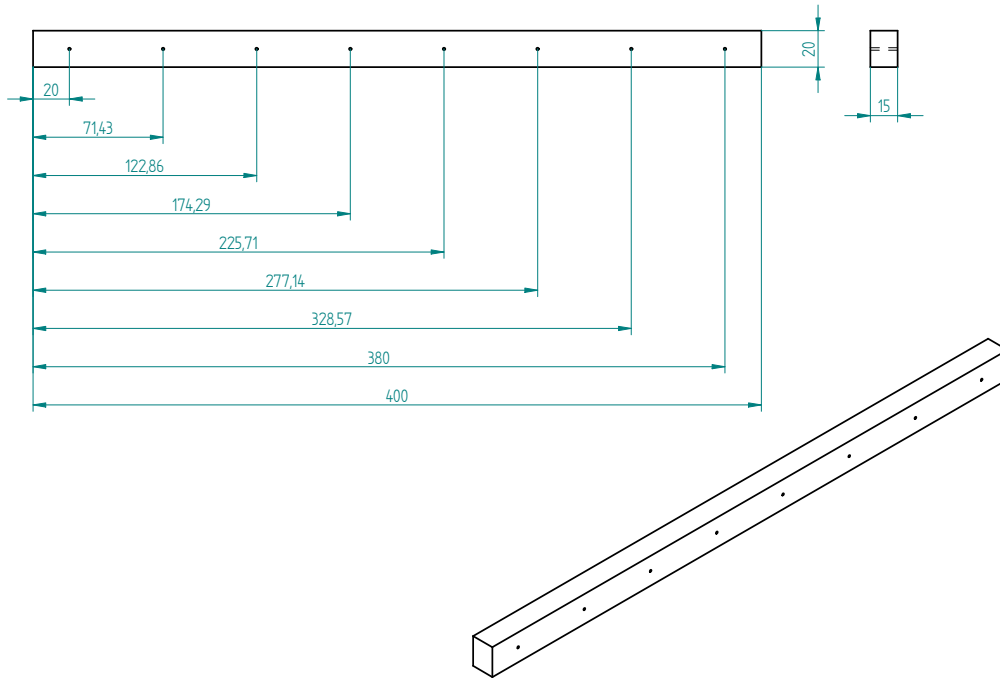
Shaped part : guide for perpendicularator tool
